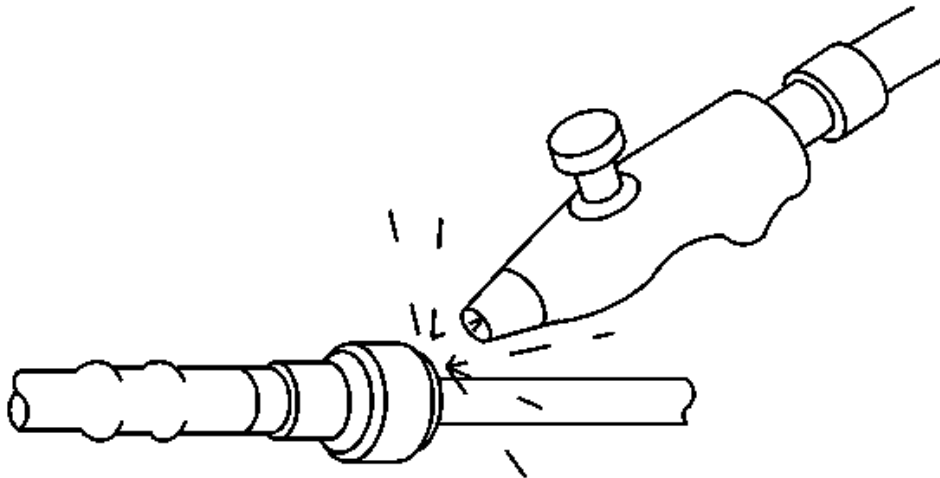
Blowing Dirt Out Of Fitting (Metal Collar)
